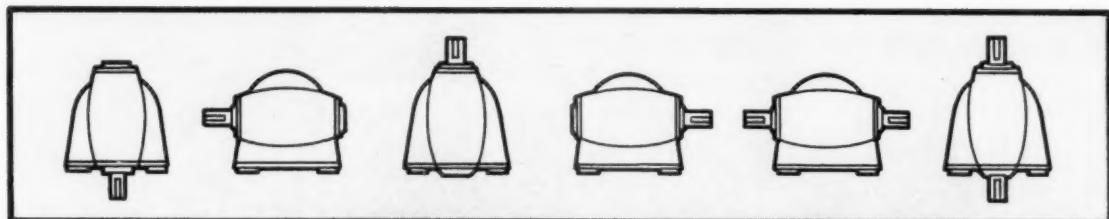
Sketches indicate possible variations in output shaft location of right-angle gearmotors.
